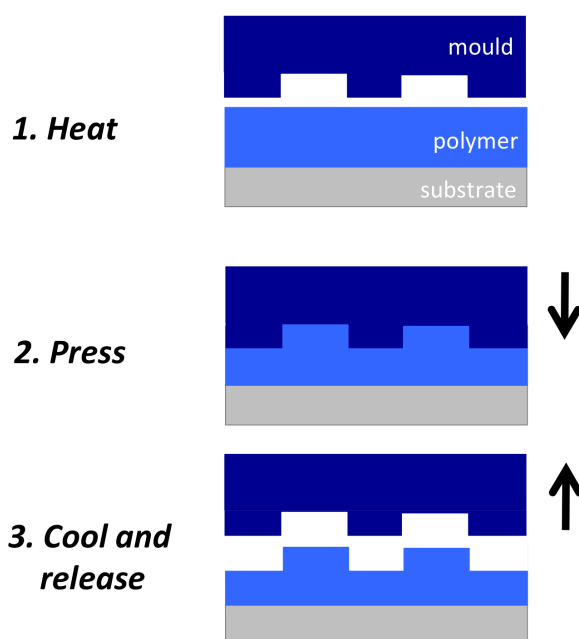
Nanoimprinting to produce PP surfaces.
